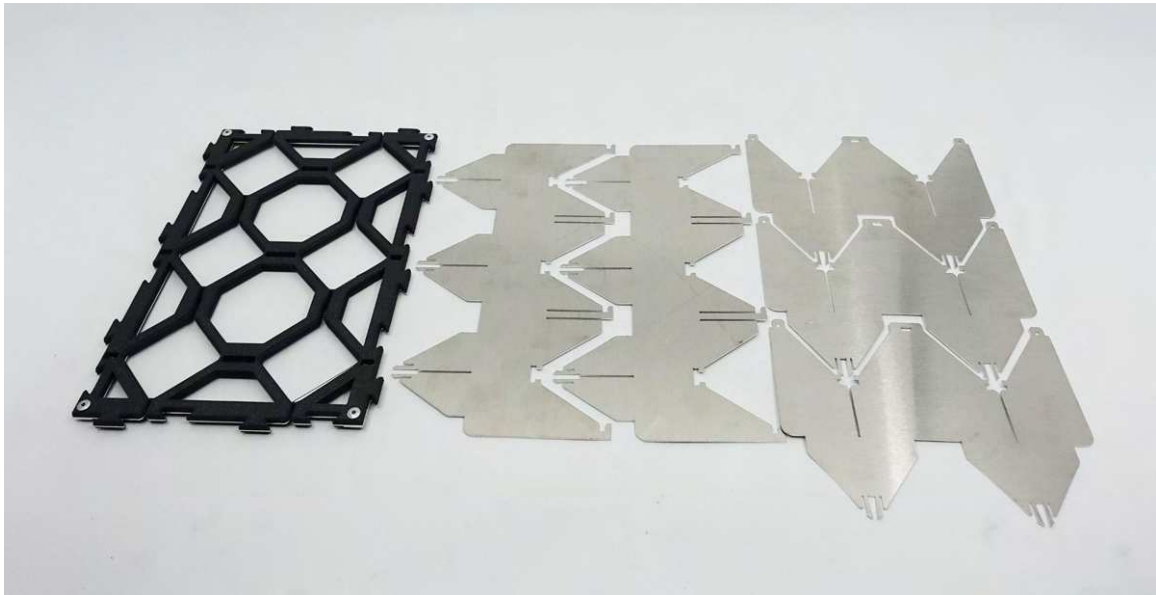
Flat layout of the part of a 2x3x1 aluminum voxel block.
